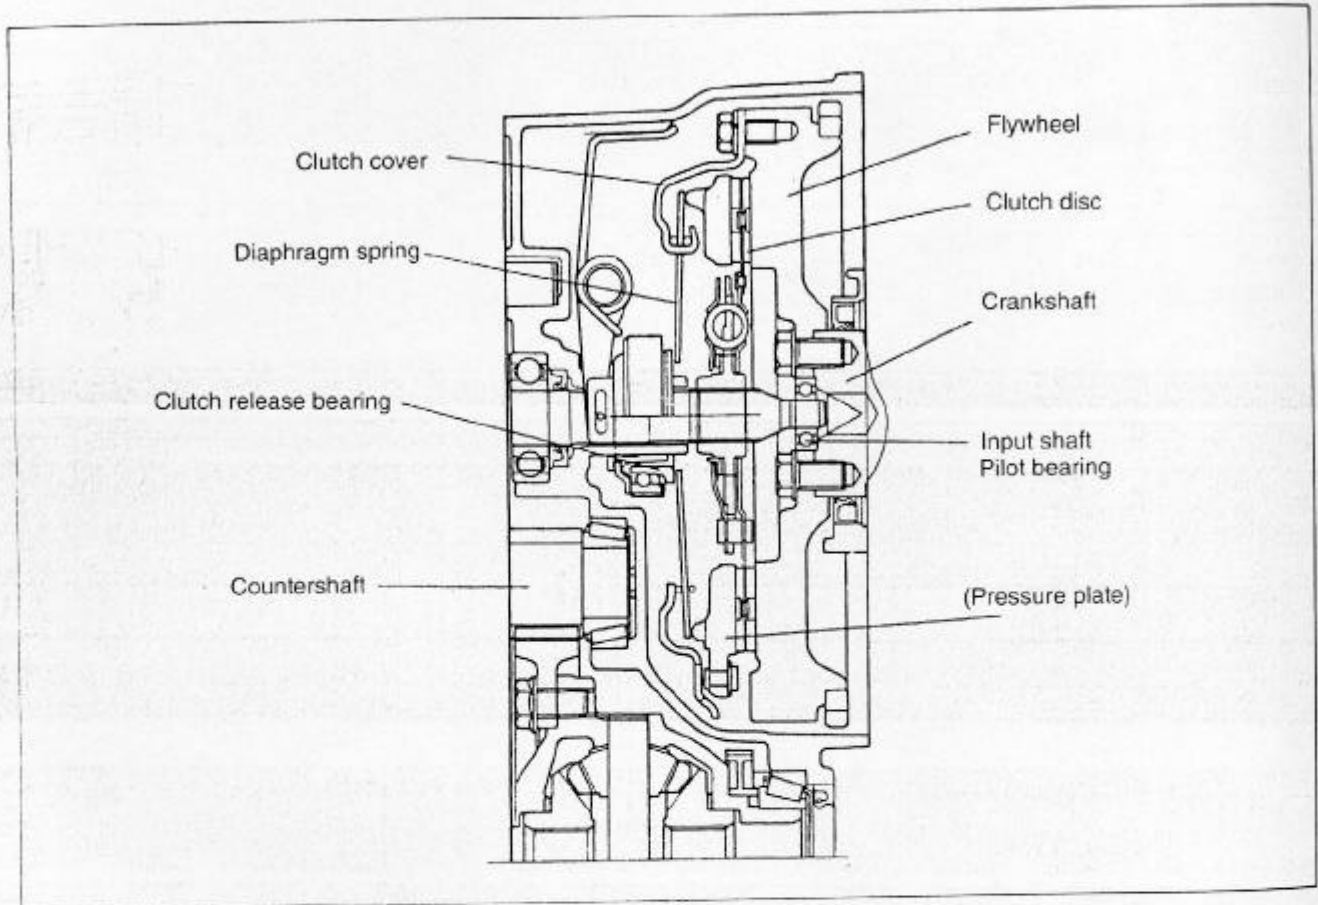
B — 1 SECTIONAL VIEW OF CLUTCH
